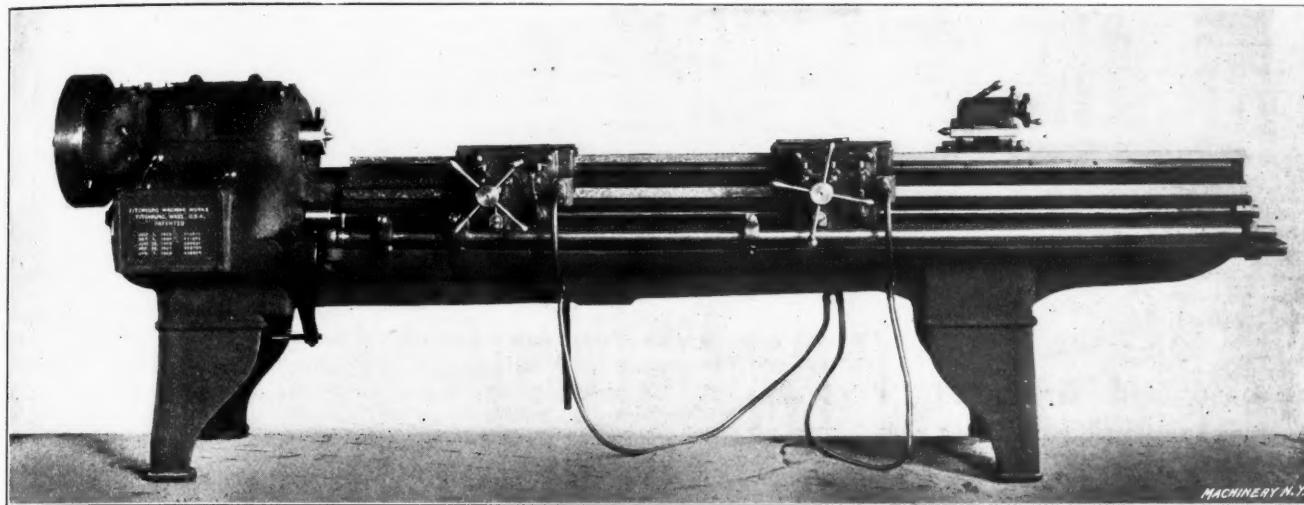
"Lo-Swing" Lathe with Bed extended to Increase the Capacity of the Machine
